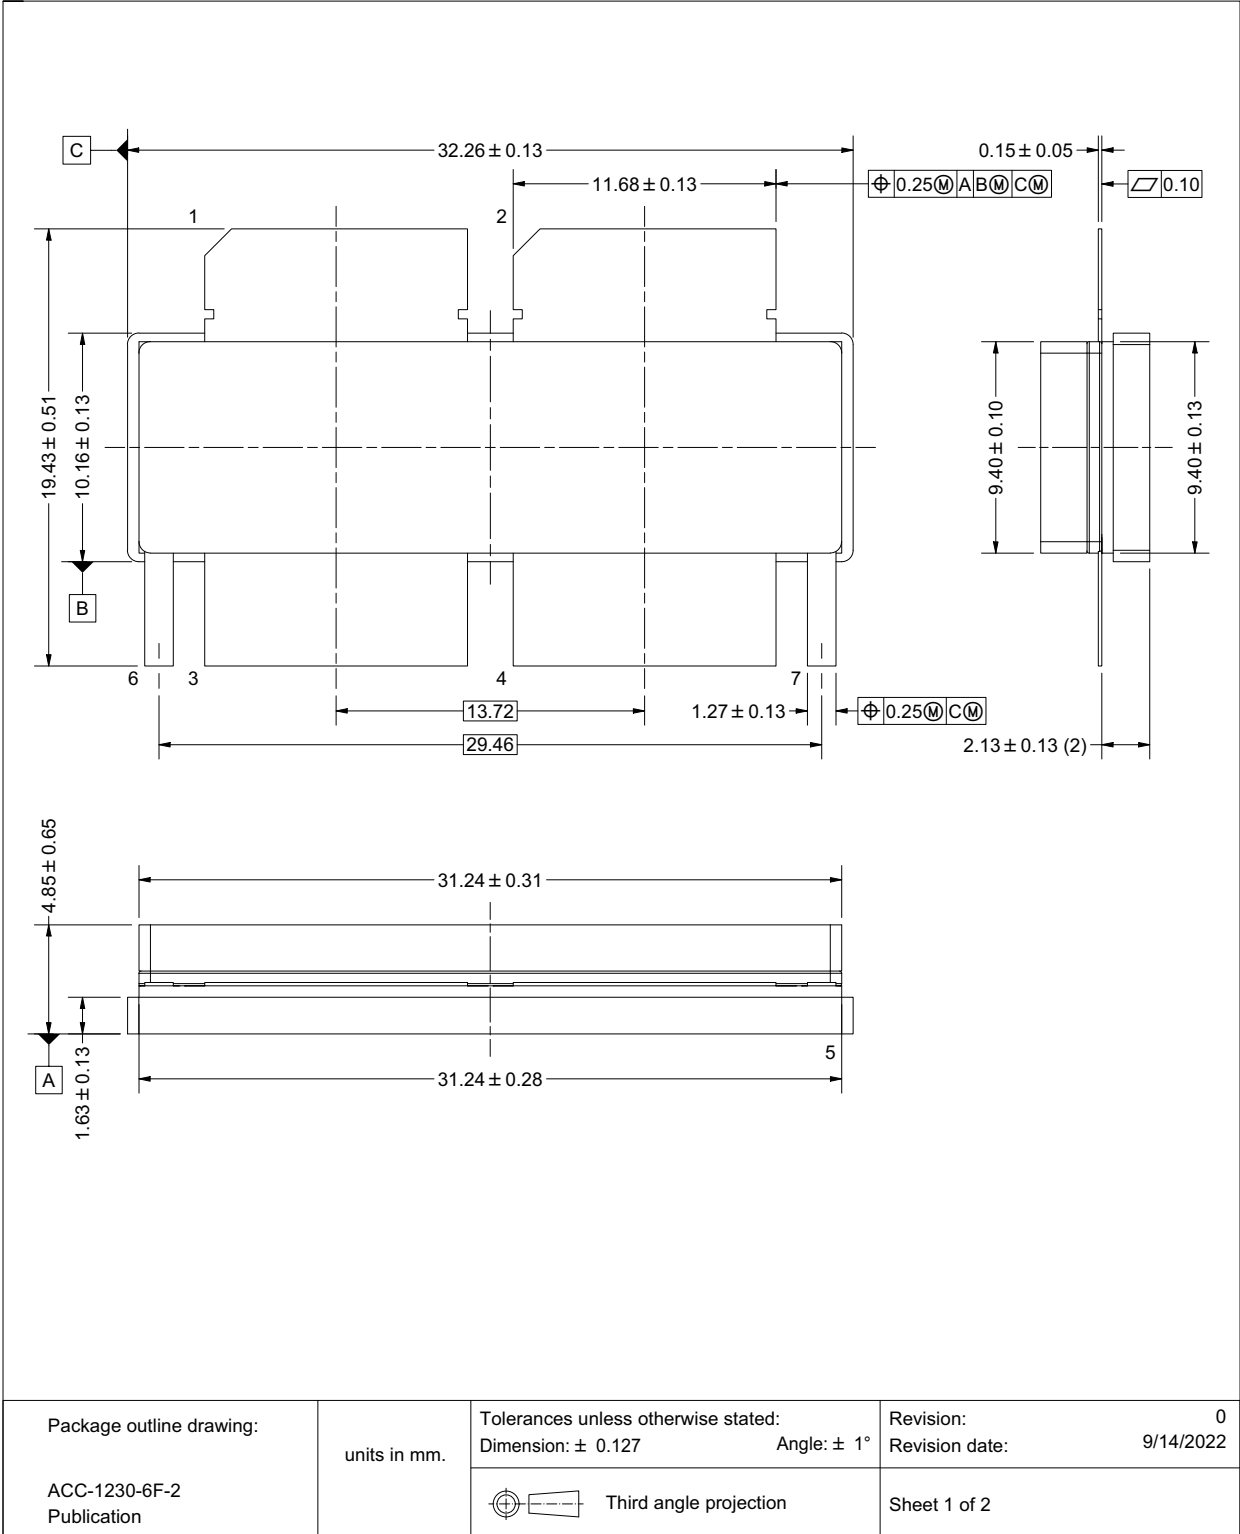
Package outline ACC-1230-6F-2 (sheet 1 of 2)
